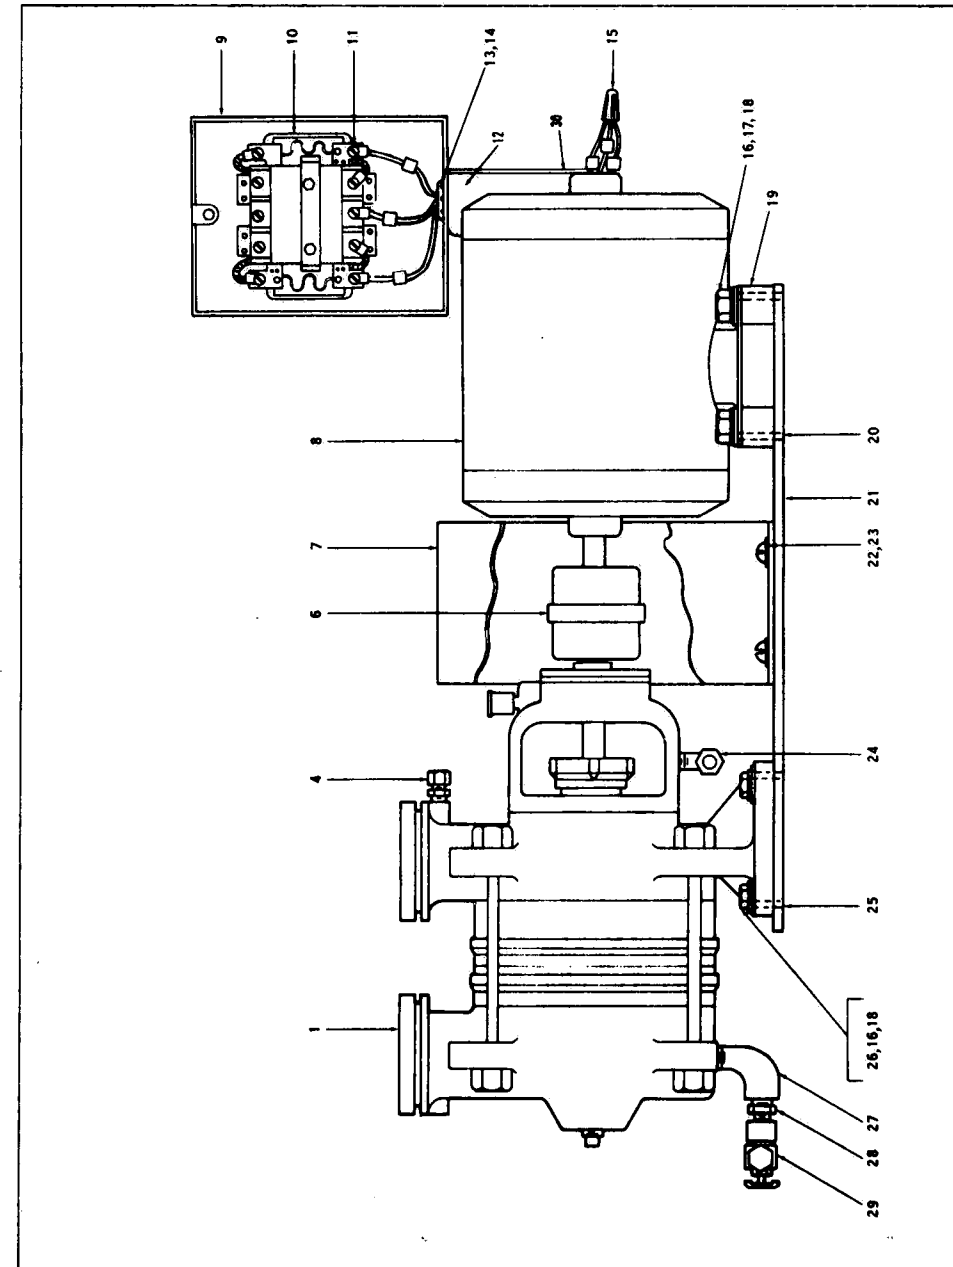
MOTOR AND PUMP ASSEMBLY.
